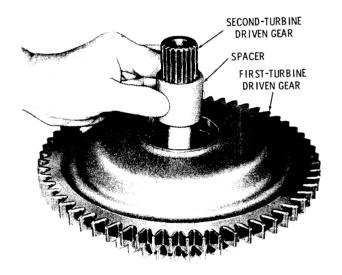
Installing bearing spacer onto second-turbine driven gear
